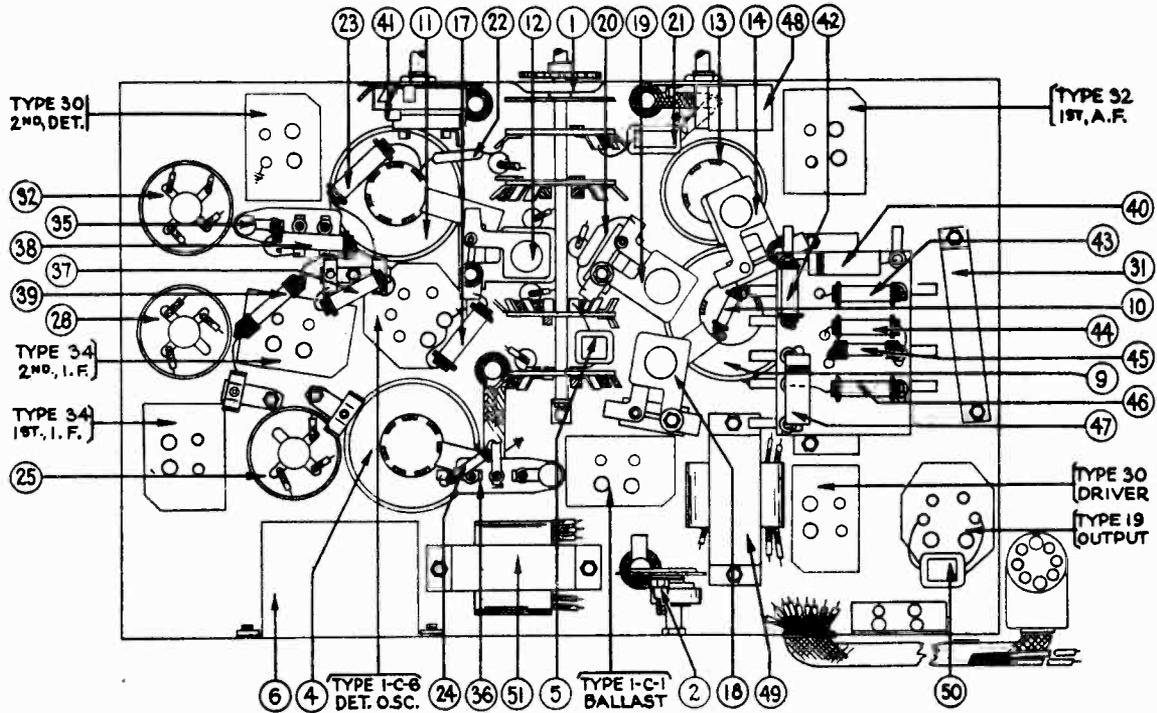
Bottom View of Chassis, Showing Parts, and Position of Compensating Condensers Reached from Below Chassis
